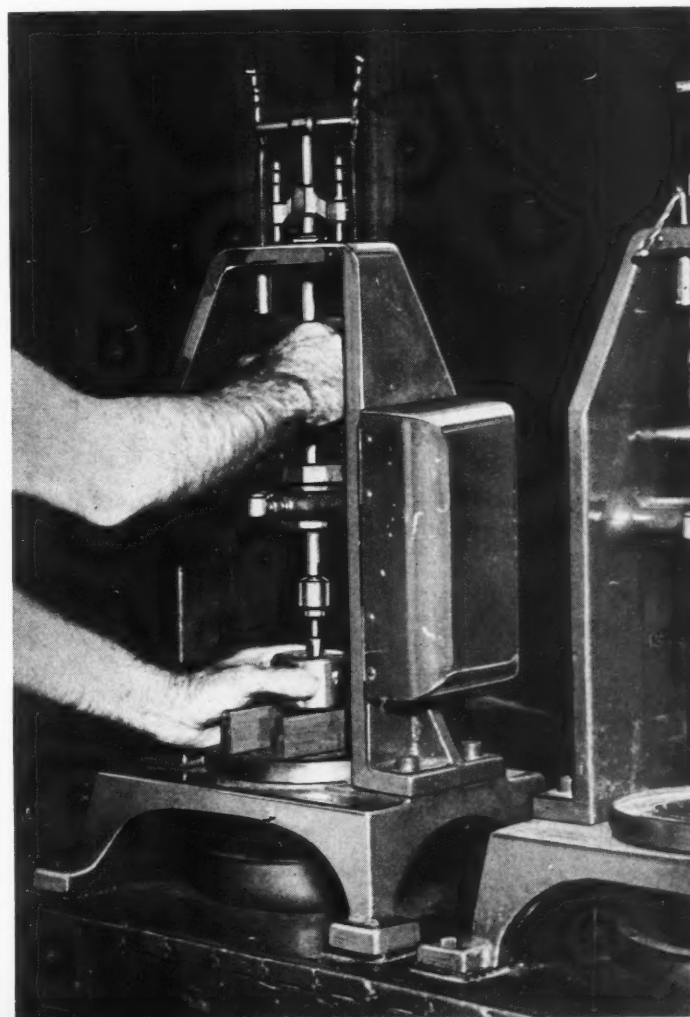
Lapping a 3/8-inch hexagonal die with a standard cold-rolled steel lap on a bench lapping machine
